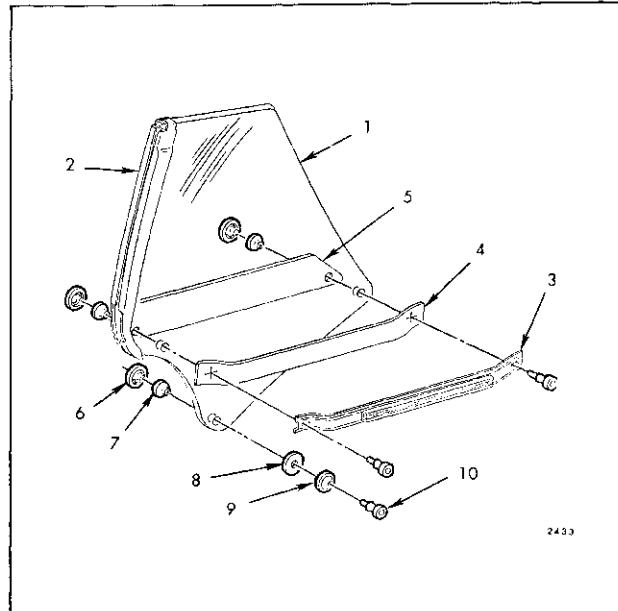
Rear Quarter Window Assembly - "B-C-47-57-67" Styles
